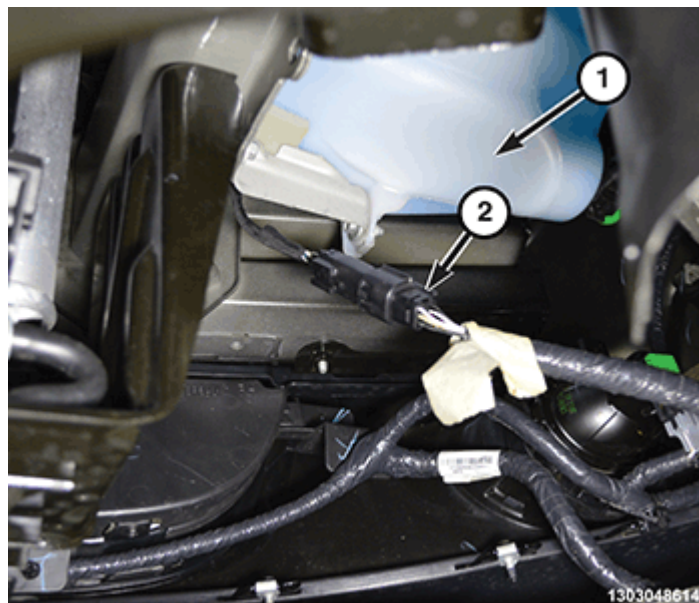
Fascia Wire Harness Connector & Washer Fluid Bottle
